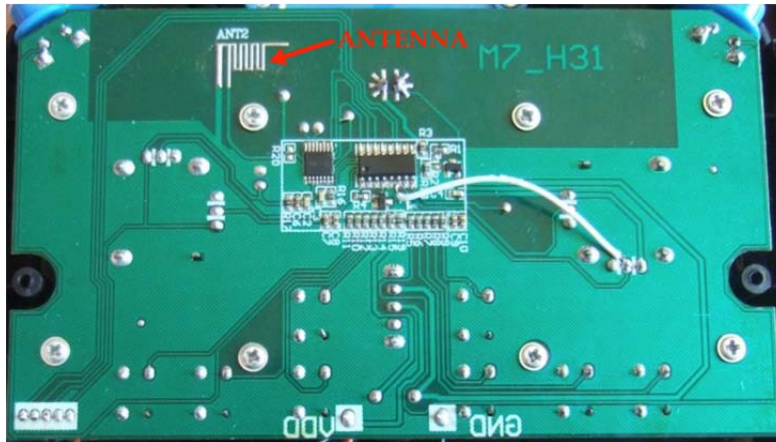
Back of the Printed Circuit Board of the H31 Remote Controller
